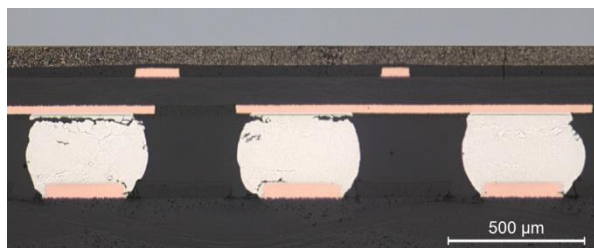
Cross-sections of solder joints T4-T6 in the second row of solder joints to a BGA208 with the ImAg/SAC305 combination that failed after 1631 cycles.
